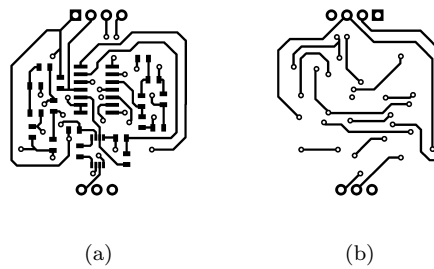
Printed circuit patterns. (a) Front layer and (b) bottom layer.
